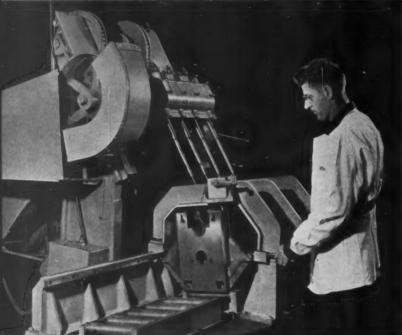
Four-spindle drilling machine that has been modified for drilling angular oilholes in block. Cored plug hole is also counterbored on this machine.
